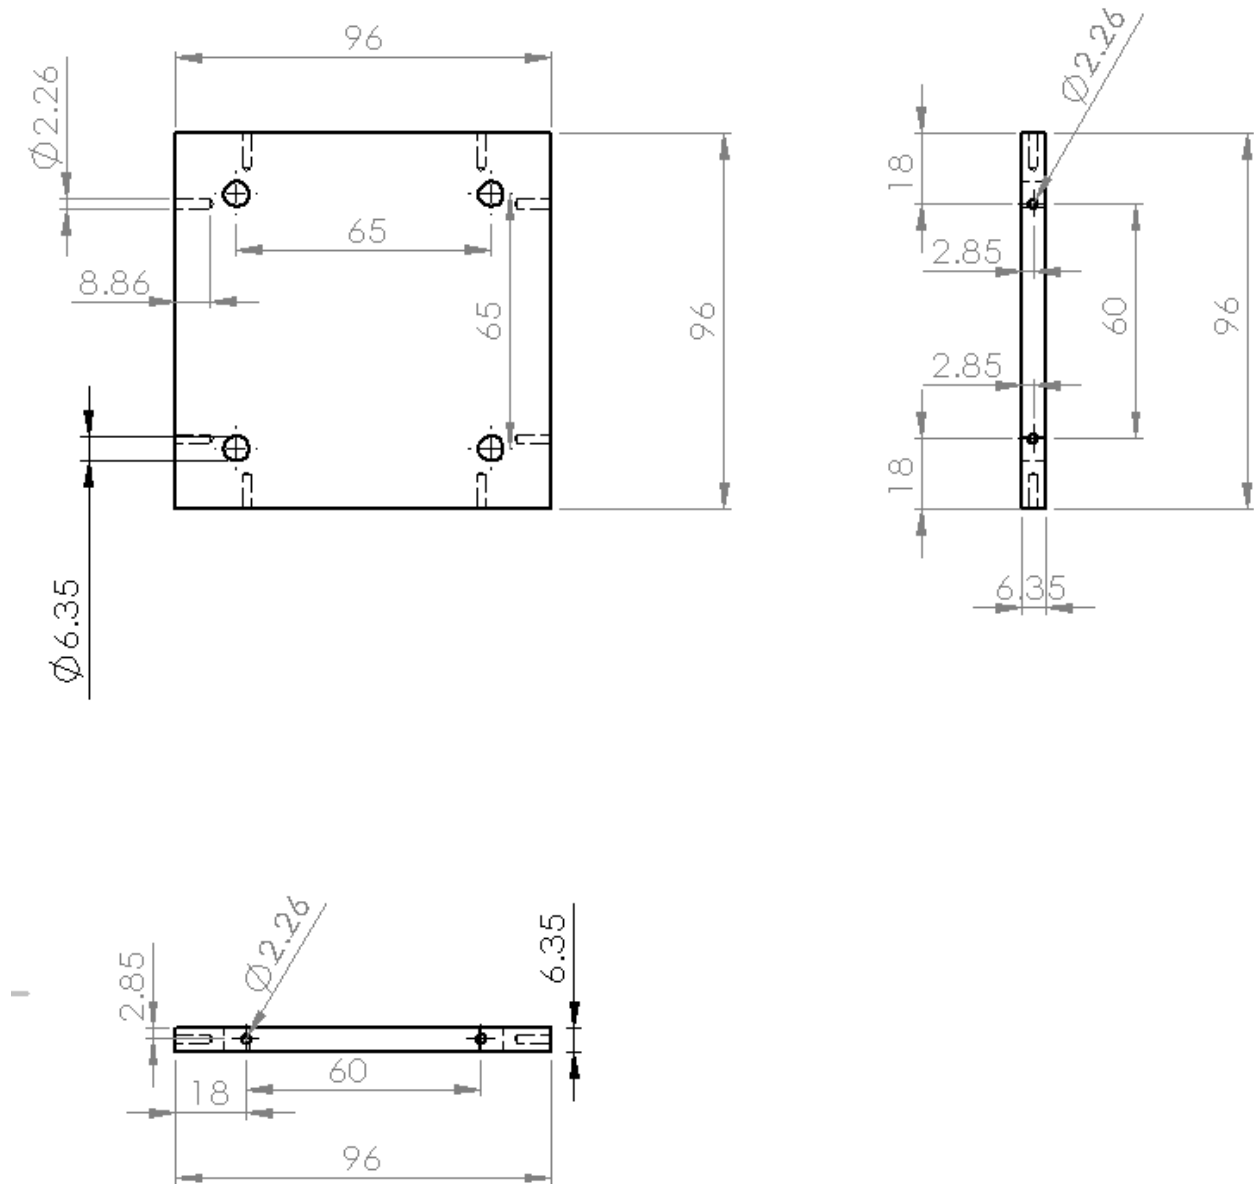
Mechanical drawing of the bottom plate of the structure with dimensions in millimeters. This plate attaches to the HASP mounting plate using $\frac{1}{4}$ -inch diameter bolts and serves as the anchor for the structural walls (see Figures 5, 6, 7 respectively).
